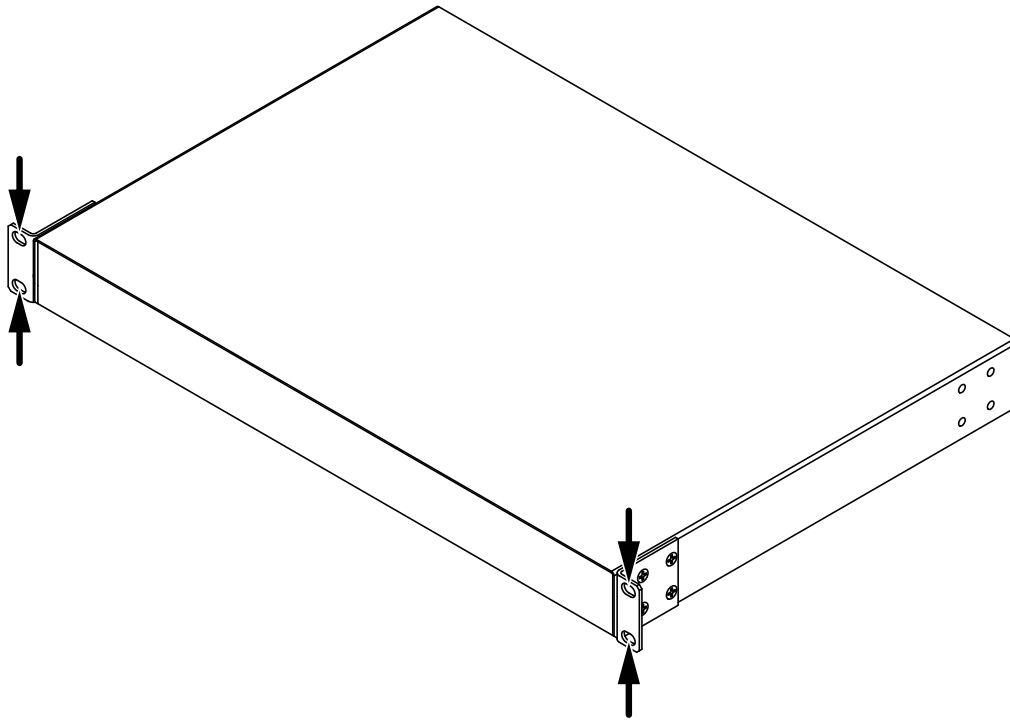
Mounting in a switch cabinet: Mounting brackets with oblong holes
